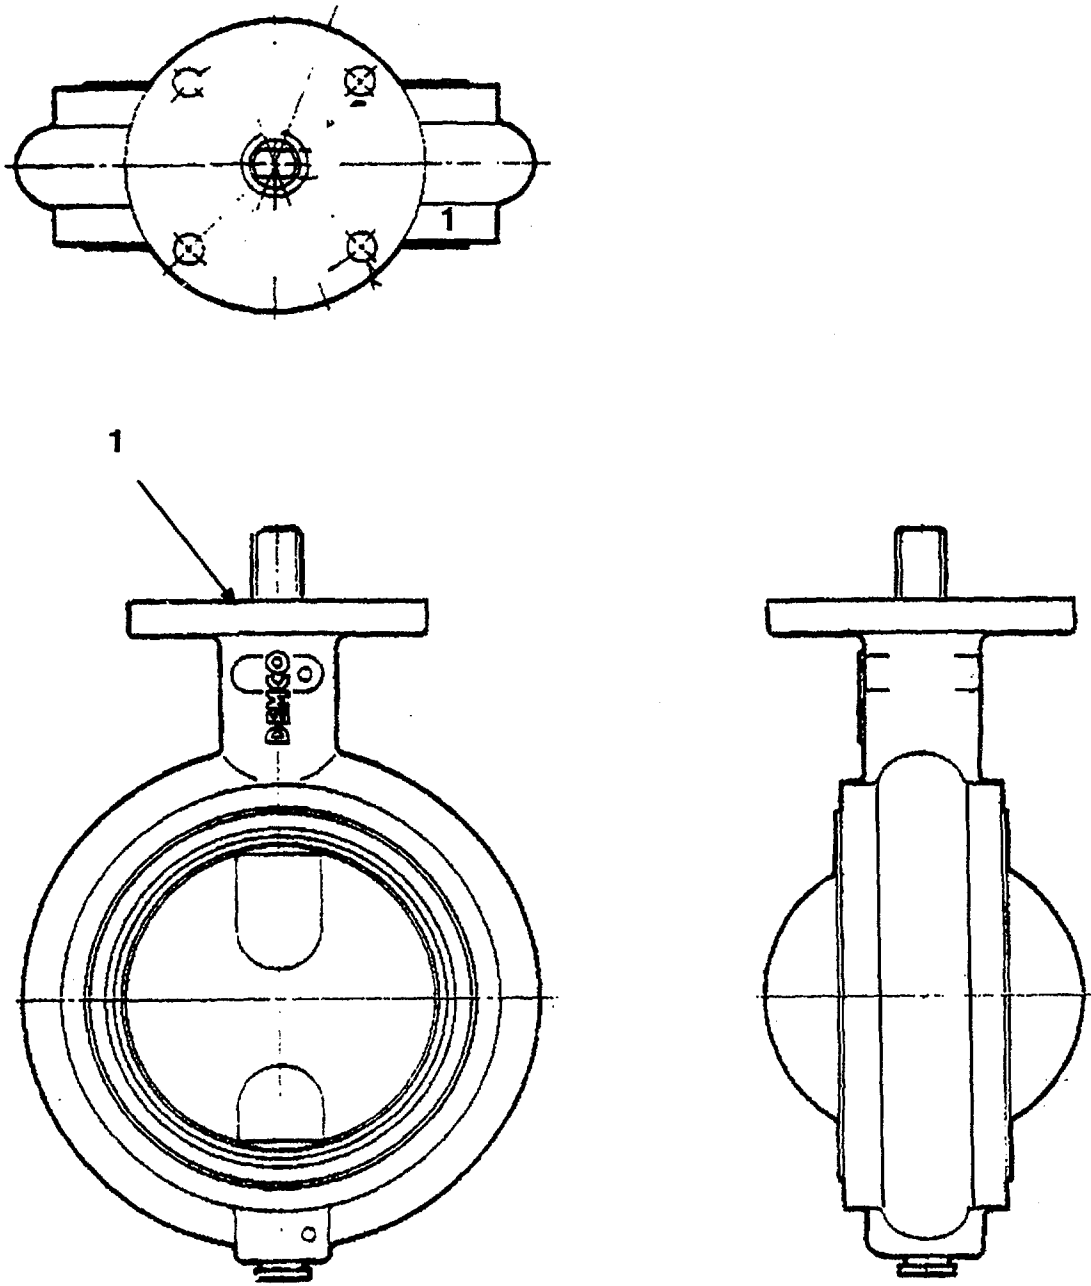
6in. Gear Operated Butterfly Valve (Sheet 1 of 2).
